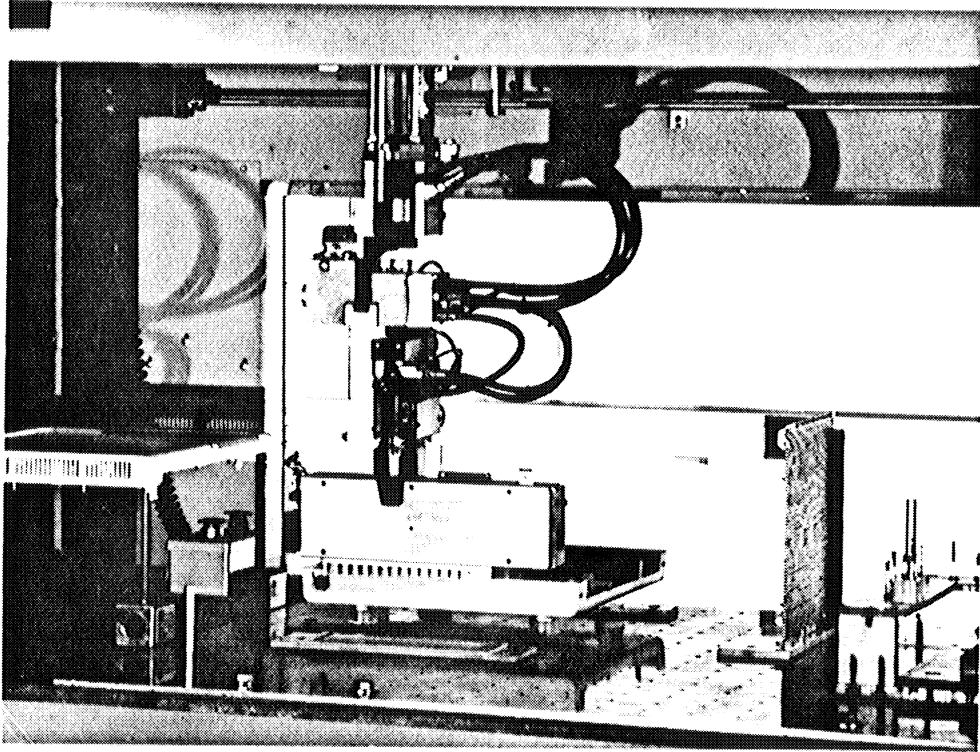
a. Power Supply Is Being Picked Up By RS2 Robot
